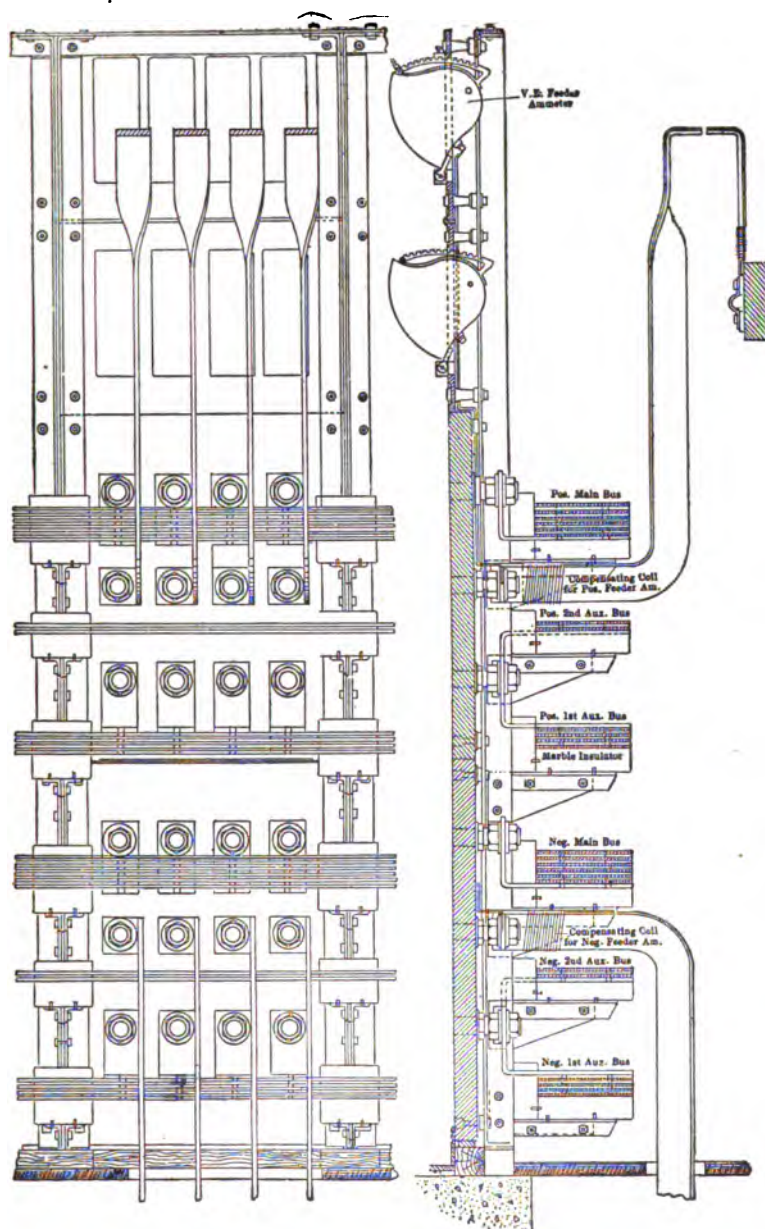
Rear Elevation and Cross Section of 1250-Ampere Feeder Panel
